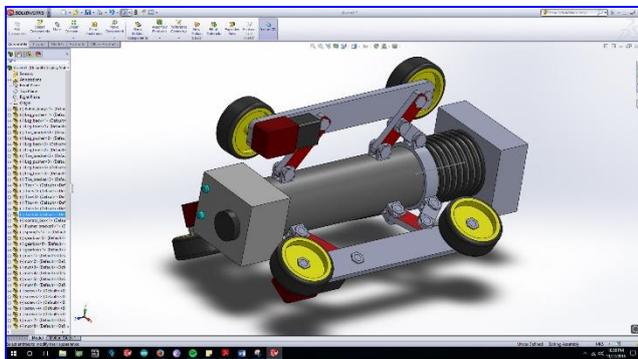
Adding the DC motor, gearbox, camera box, springs, and camera
